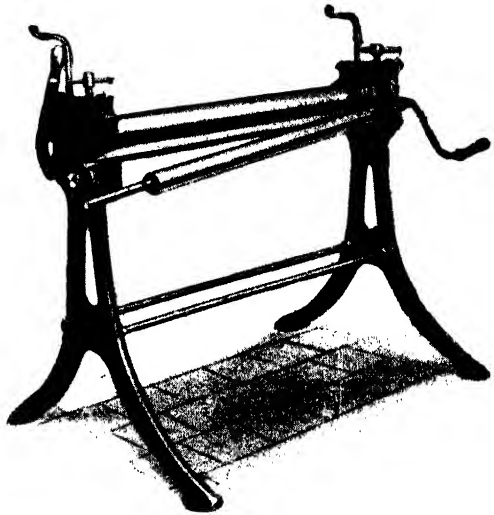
BENDING ROLLERS, SHOWING SLIP ROLLER OPEN
